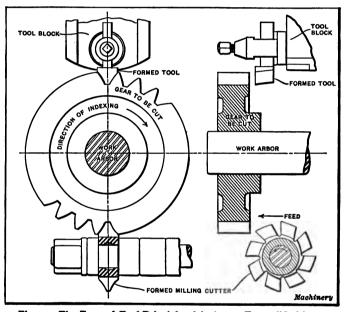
The Formed Tool Principle of Action as Exemplified by a Shaper Tool and a Milling Cutter
